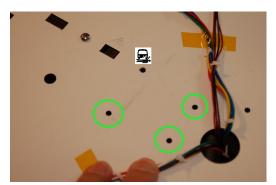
Three mounting holes and JJ's Bus.
